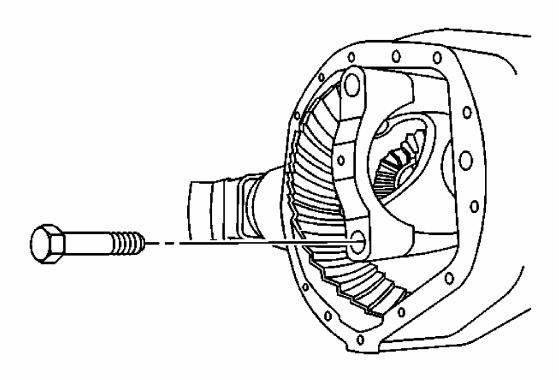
Removing/Installing Bearing Cap Bolt Courtesy of GENERAL MOTORS CORP.
